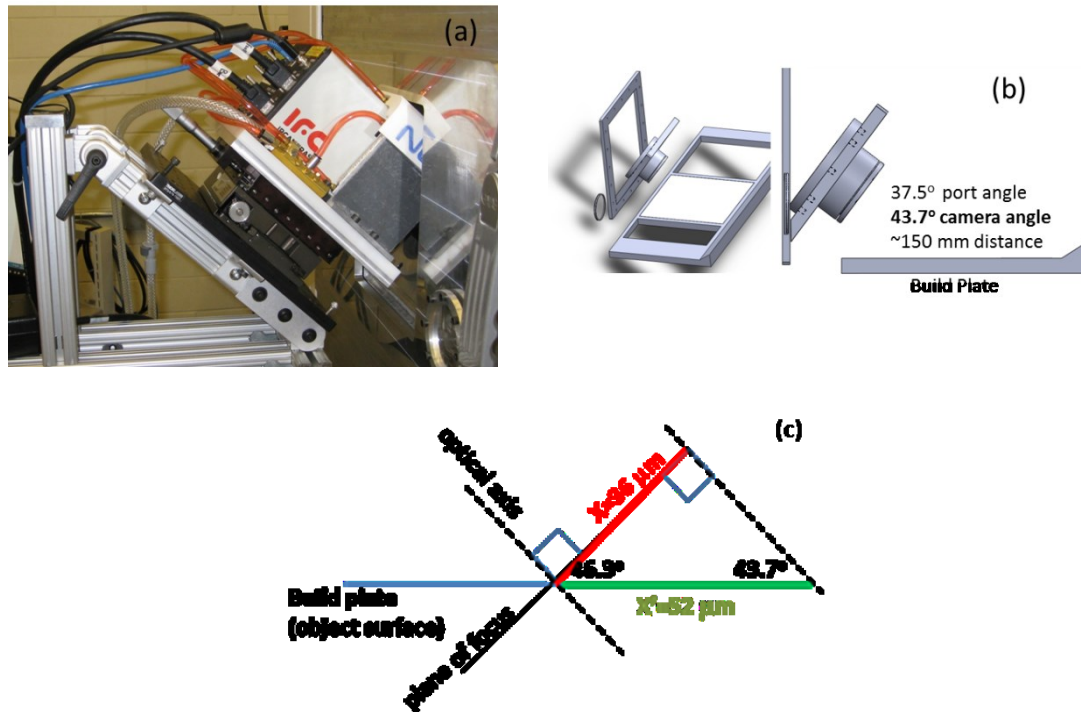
Thermal camera setup, (a) Side-view of the EOS machine, custom door, and thermal camera, (b) Solidworks model of EOS build chamber + custom viewport, (c) optical axis, plane of focus and scene size.
